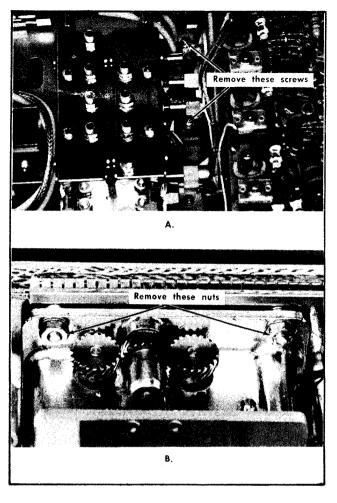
Preparation to remove the oscillator and tuner assembly.
